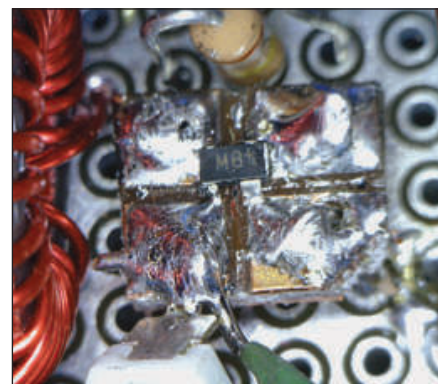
Enlargement of BF998R MOSFET and mounting substrate installed in the 75 meter receiver.
